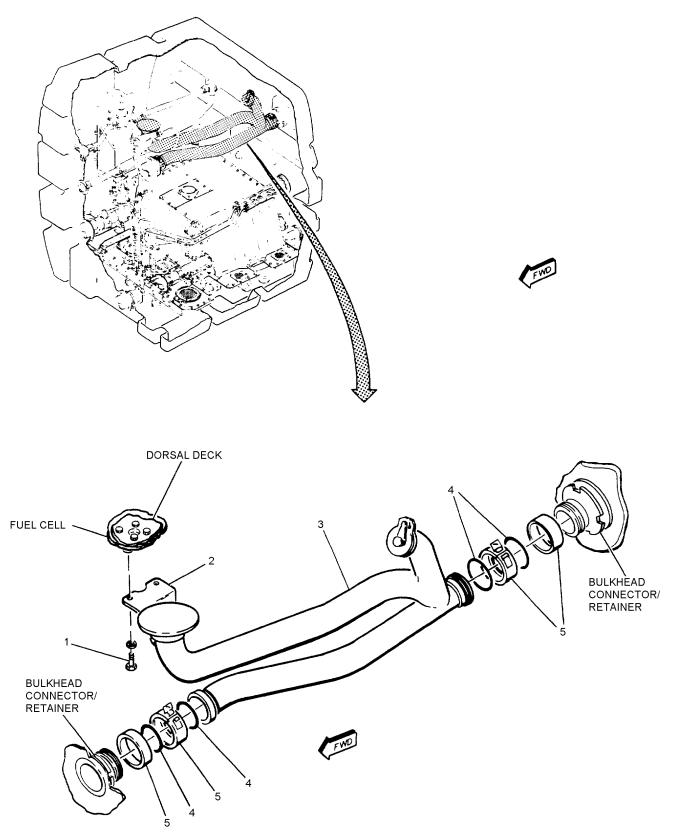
No. 2 Fuel Tank Dive Vent Check Valve (5VAP593) (Sheet 1)
